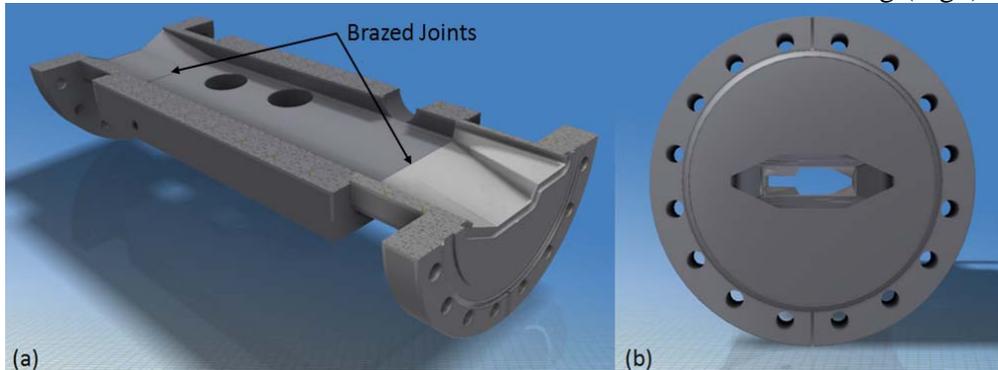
(a) Cross section of a three piece vacuum chamber. (b) View looking upstream towards septum chamber.
